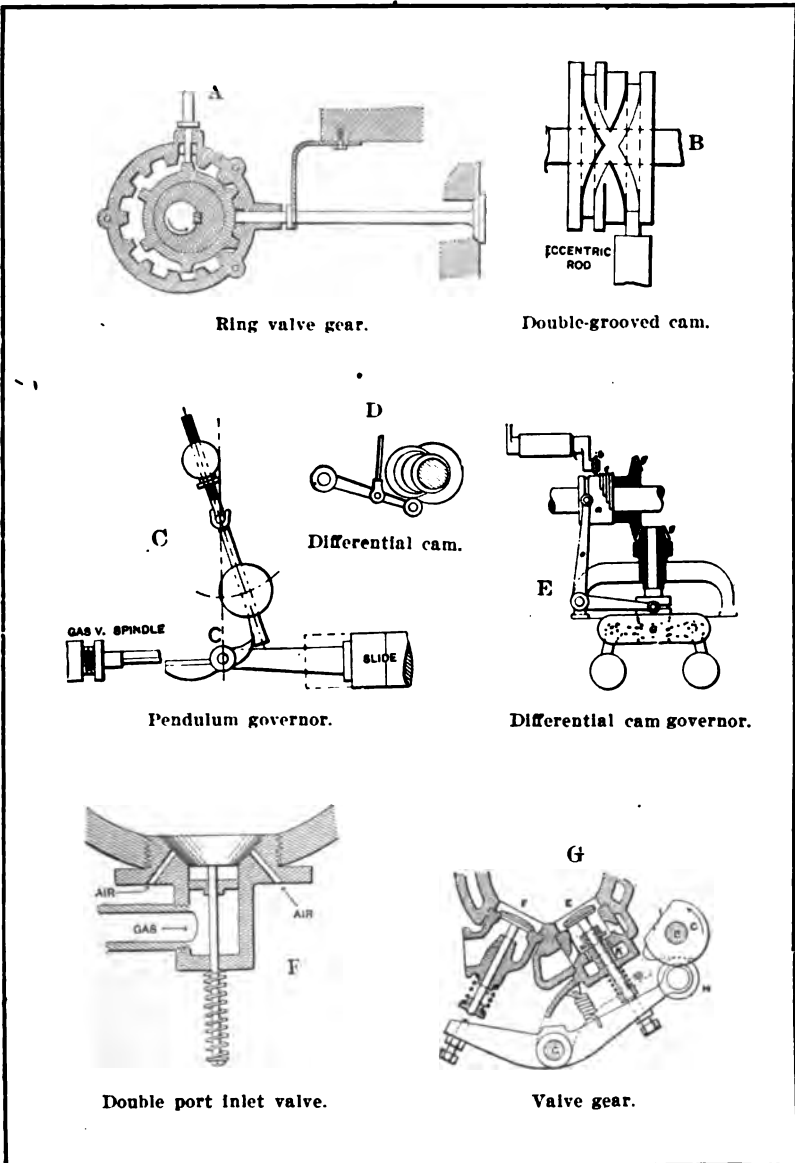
A. Ring valve gear. B. Double-grooved cam. C. Pendulum governor. D. Differential cam. E. Differential cam governor. F. Double port inlet valve. G. Valve gear.
